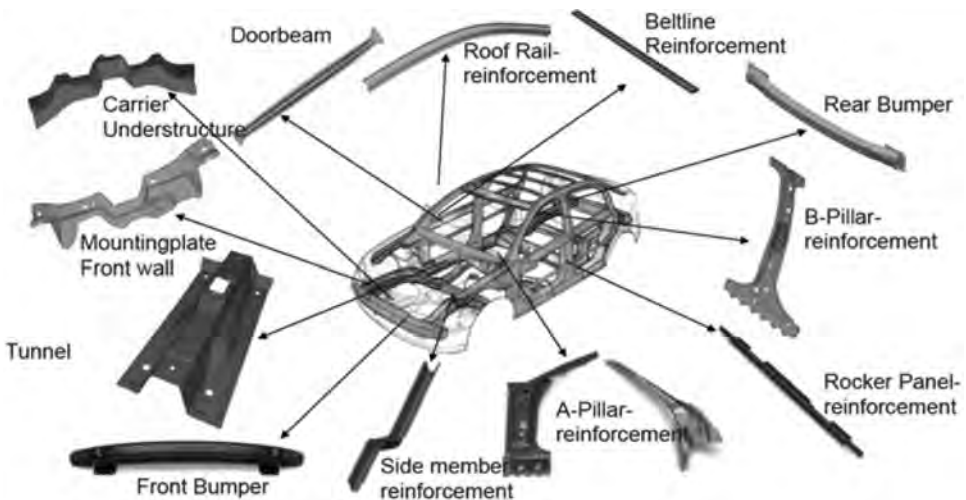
Components manufactured using hot stamping. Source: Ref 7.1
